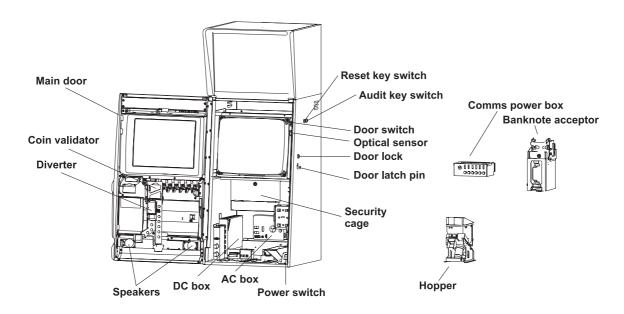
Components in the Endeavour Series Upright Gaming Machine
